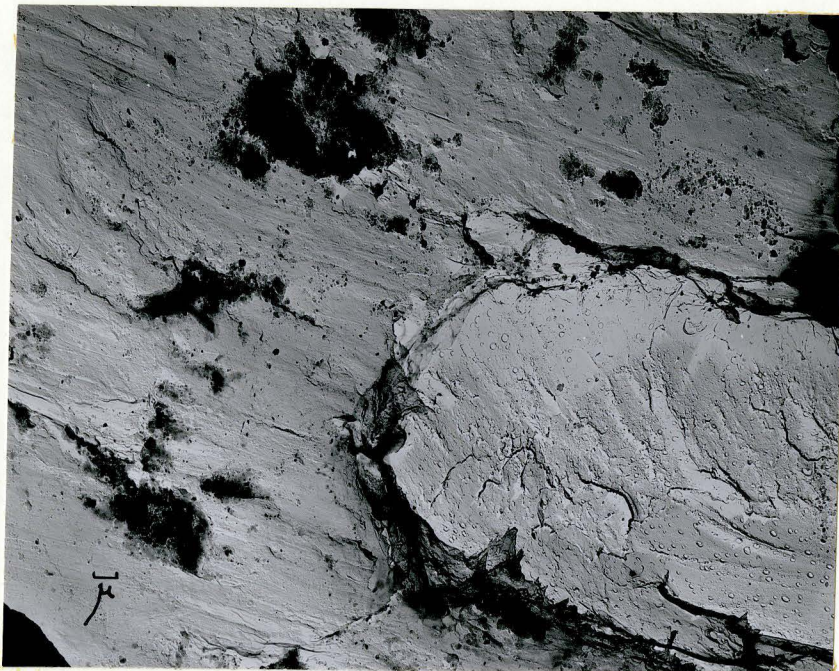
Electron fractograph of fatigue fracture surface.
